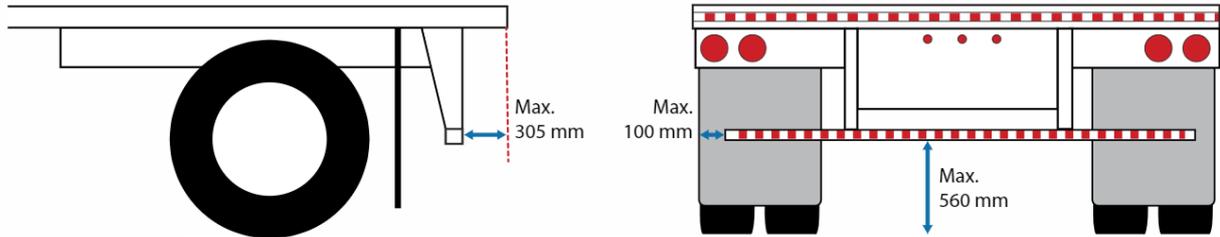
REAR IMPACT GUARD DIMENSIONS
